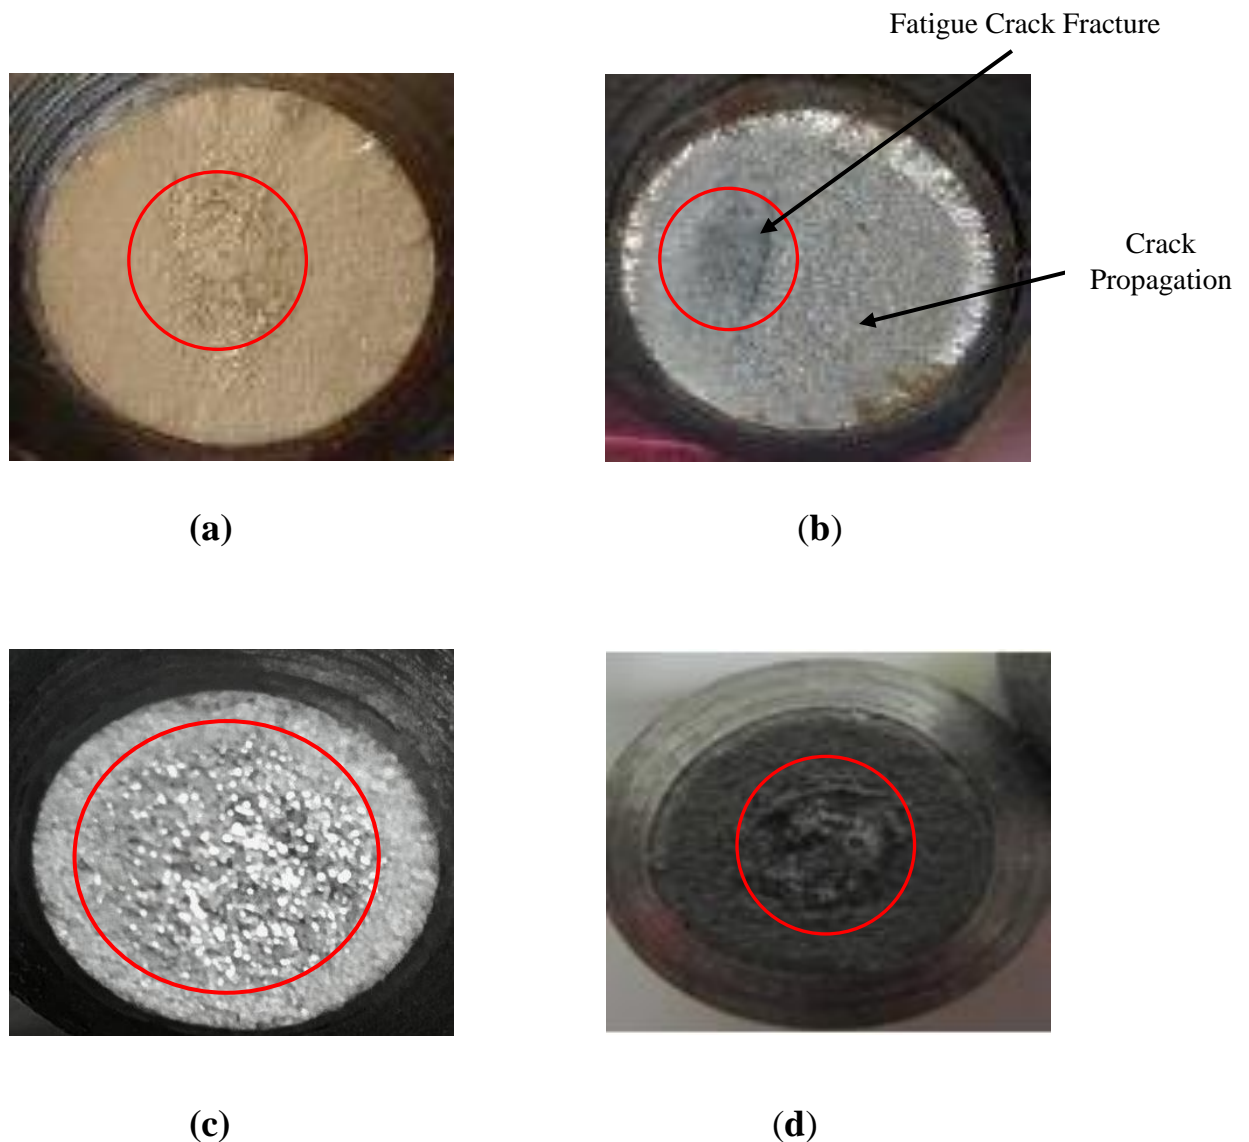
Fracture surface of a specimen: (a) with carbonitriding. (b) With pack carburizing followed by quenching. (c) With pack carburizing without quenching. (d) Specimen without treatment.
